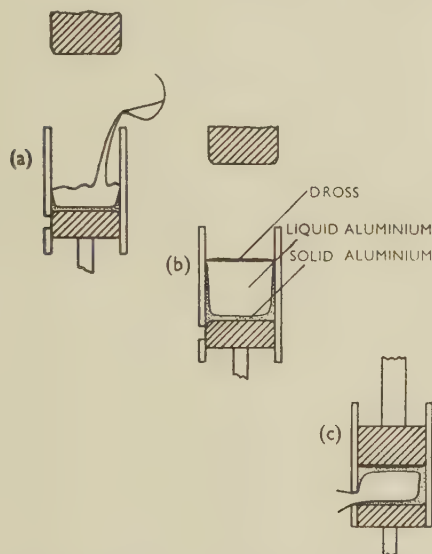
Cold-Chamber Pressure Die-Casting Machine of the Vertical-Sleeve Type. Comparison of stages (a)–(c) with Fig. 1 shows that far less chilling occurs and that no air is injected into the metal.
